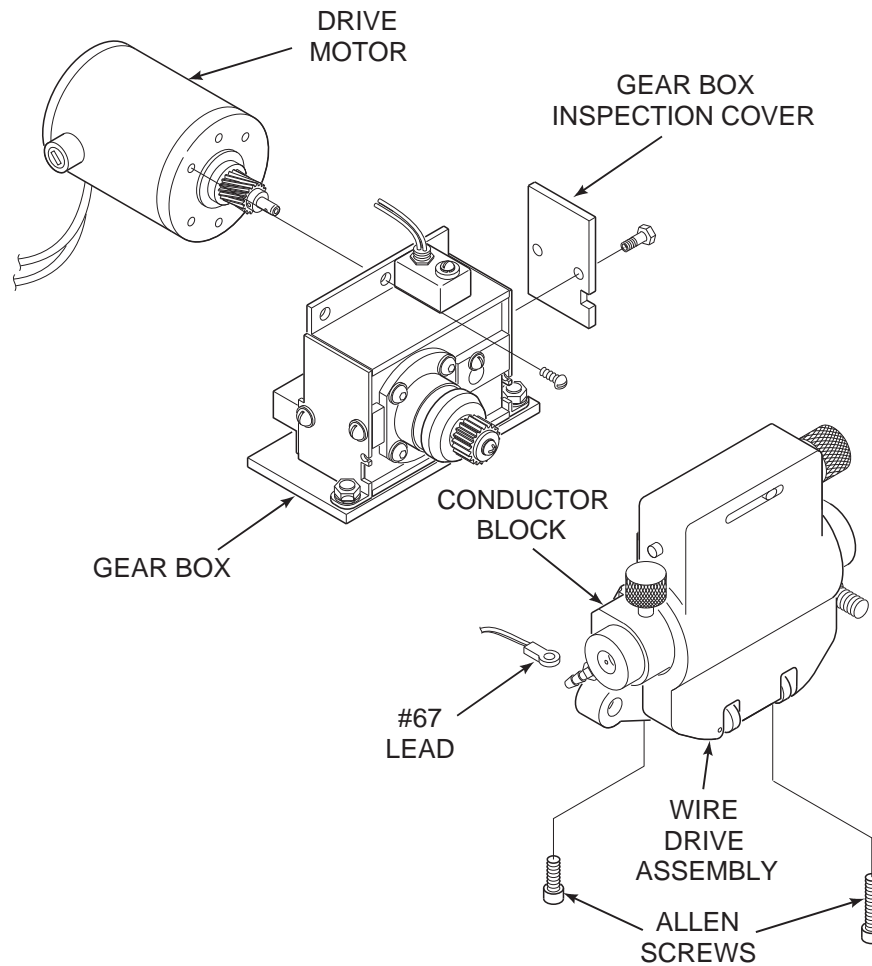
WIRE FEED ASSEMBLY REMOVAL.
